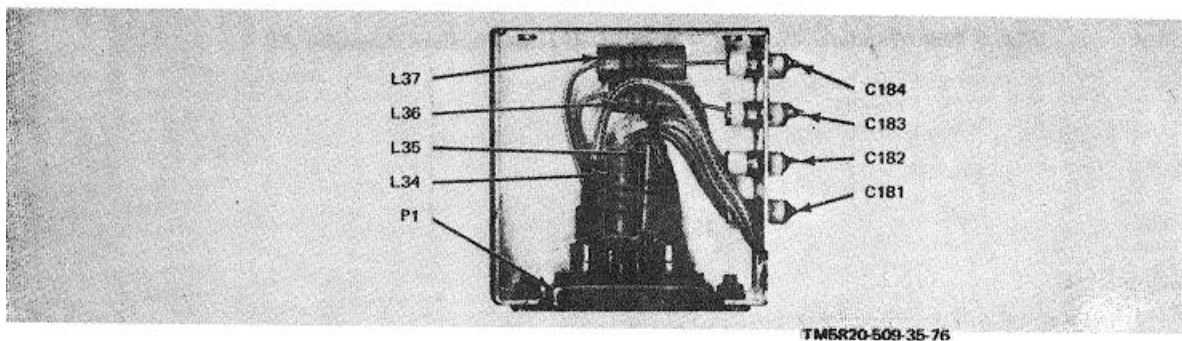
Oscillator Control C-4311 PRC-47 (A8A7), Line Filter Assembly At Connector P1, Cover Removed.
